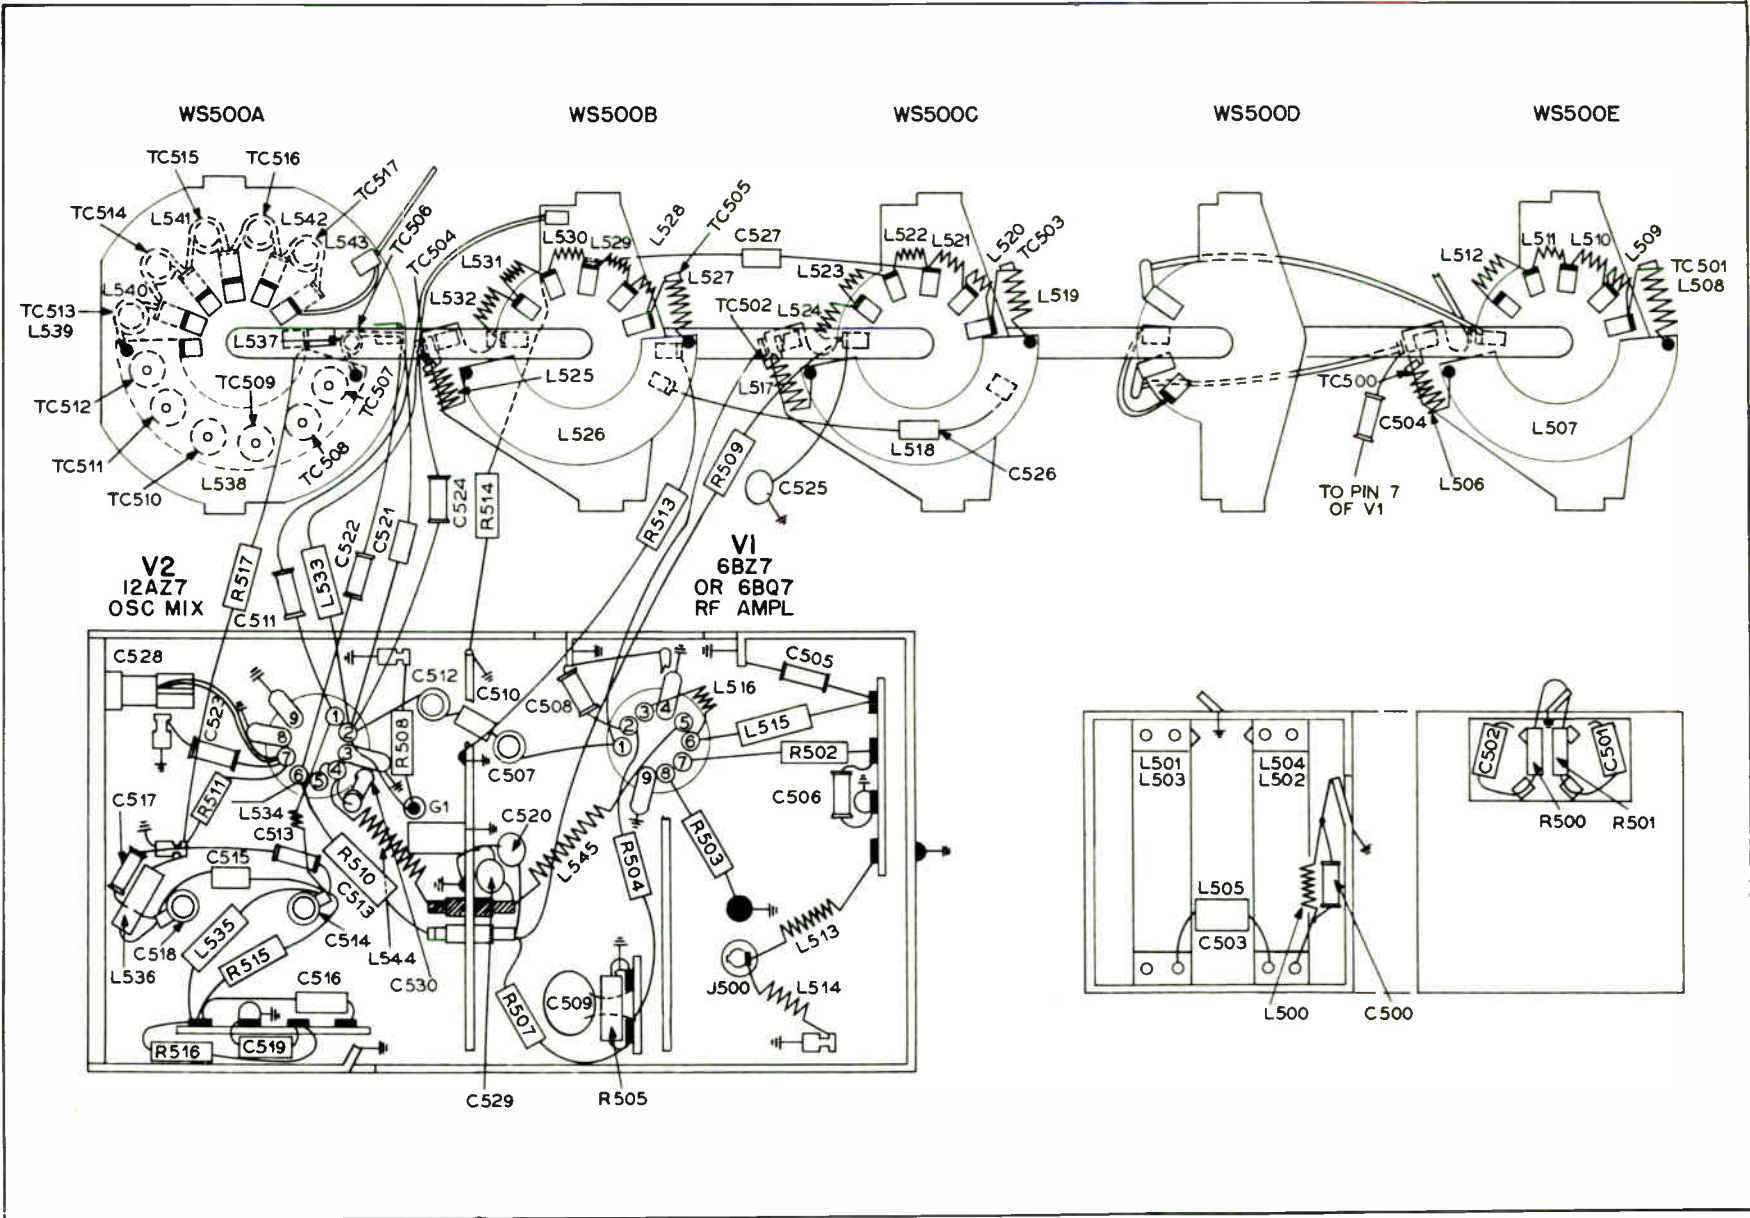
Television Tuner, Part No. 76-7600, Base Layout
